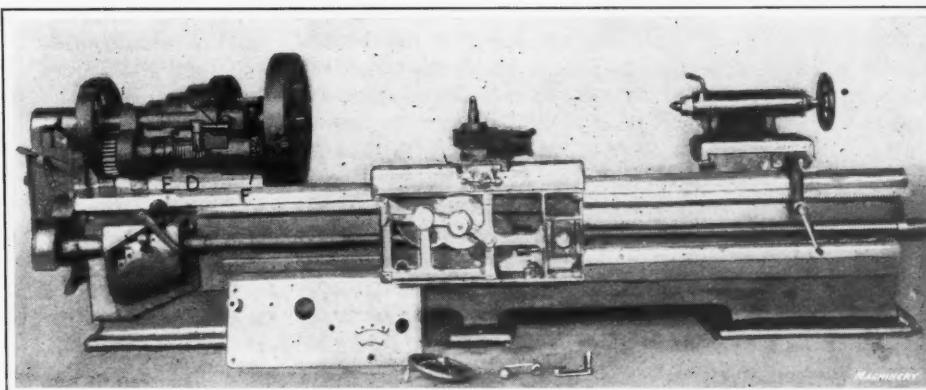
Needham Double-purpose Lathe with Front Plate removed from Apron
